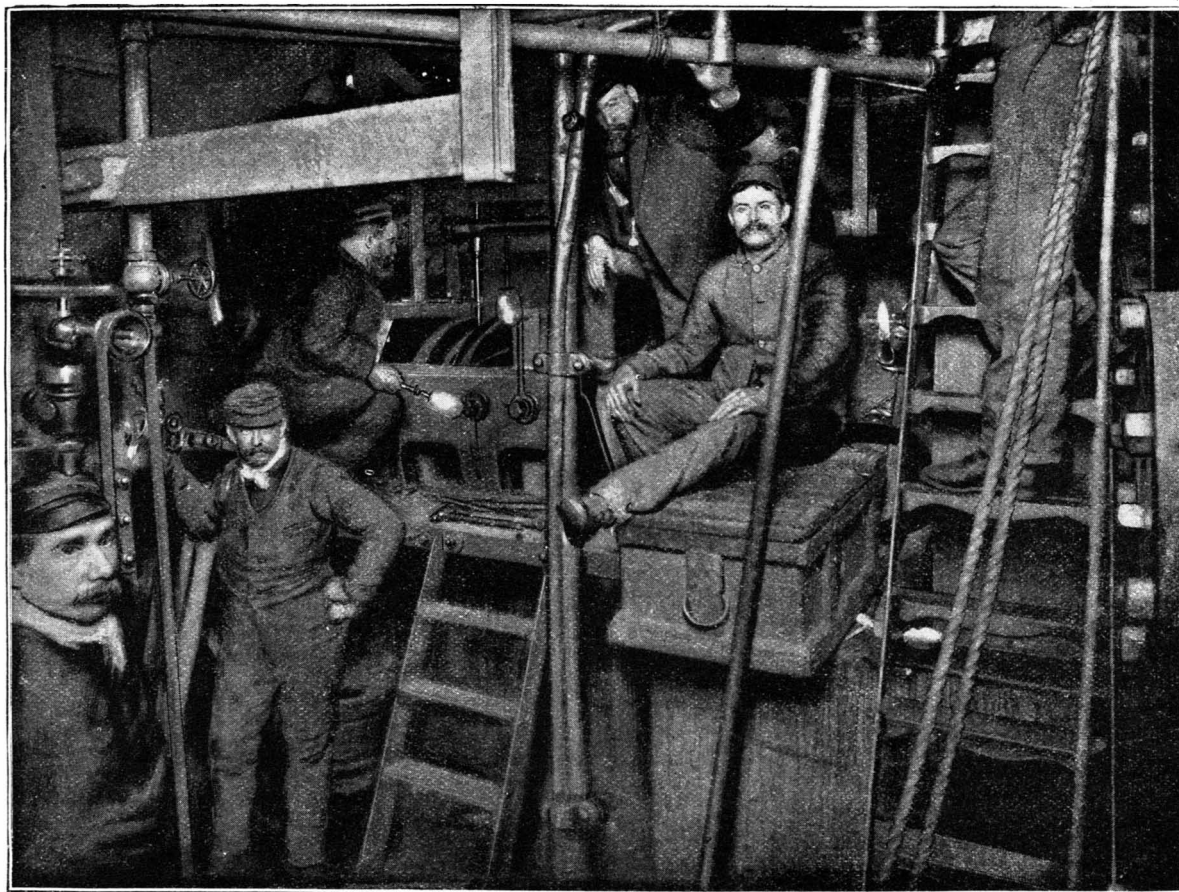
STEAMER UMBRIA—VIEW OF THE DRILLING MACHINE AND MAIN SHAFT.
